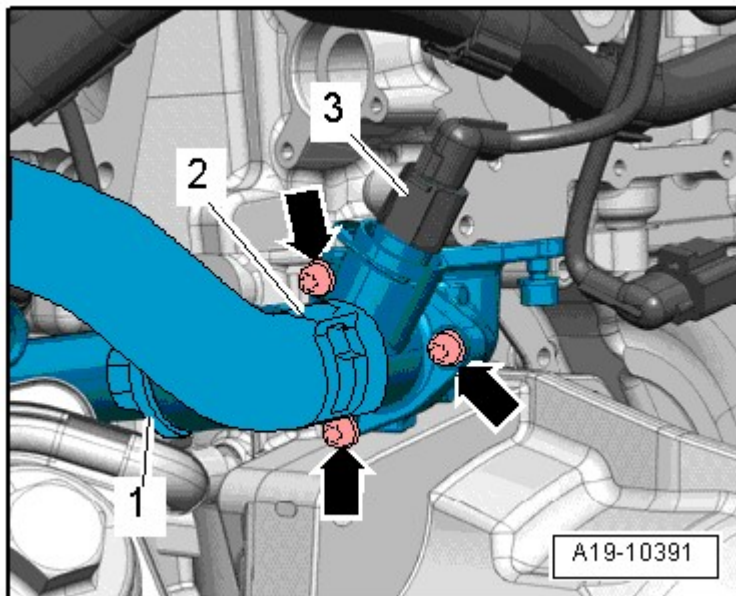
Identifying Bolts -Arrows- On Coolant Connecting Pieces
